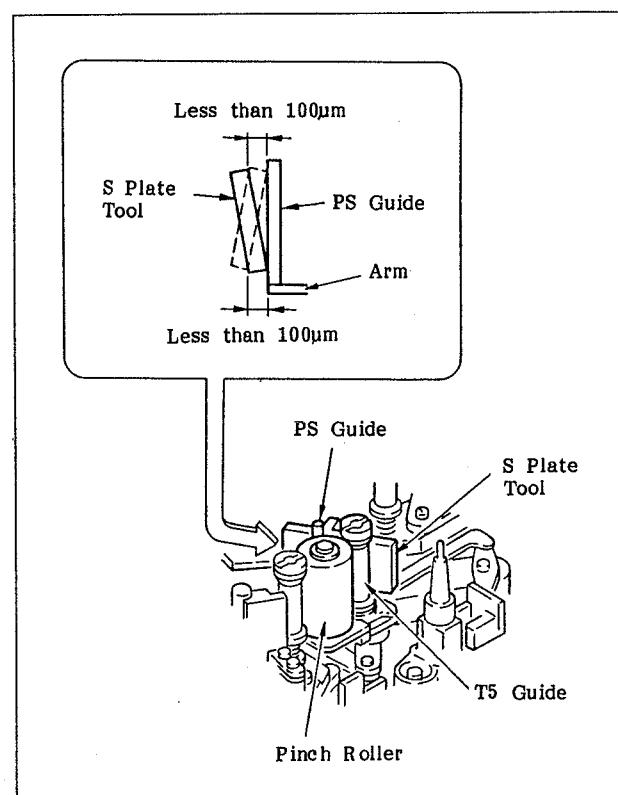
Adjustment of the Tilting of the PS Guide
